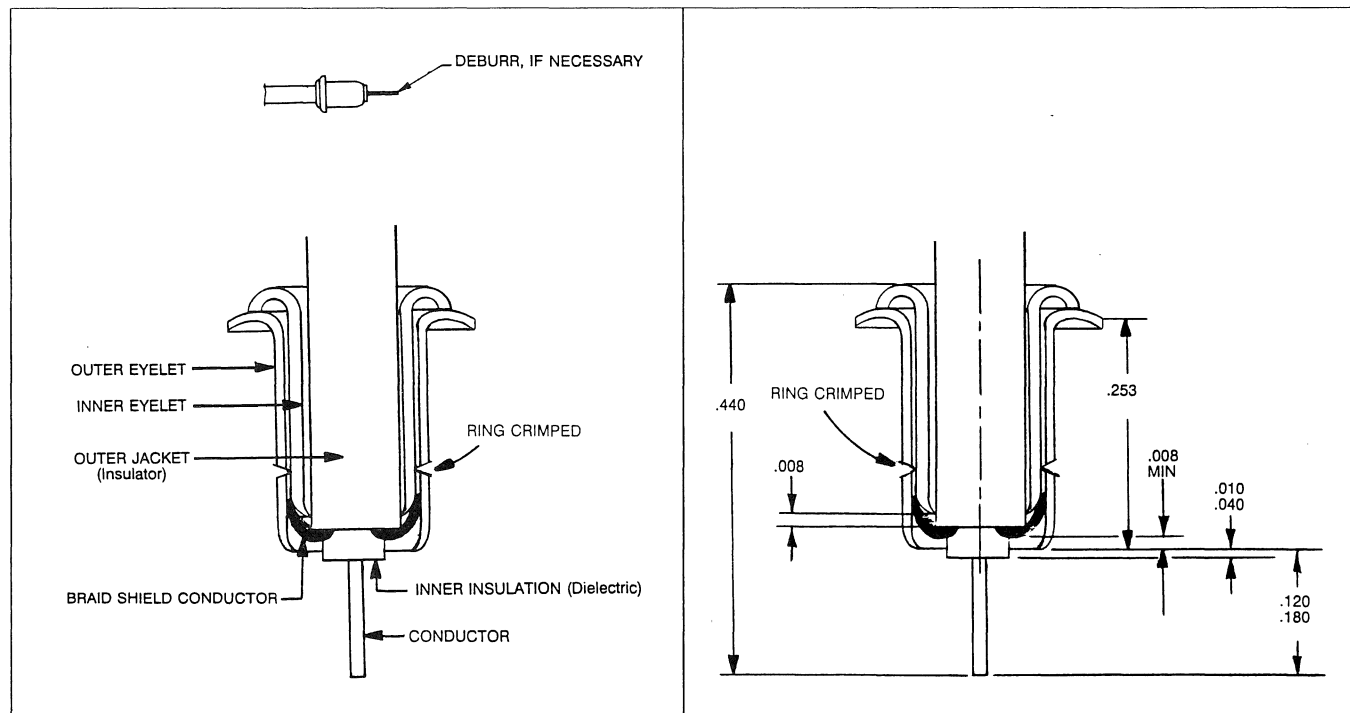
ASSEMBLED CONNECTOR DIMENSIONS.
